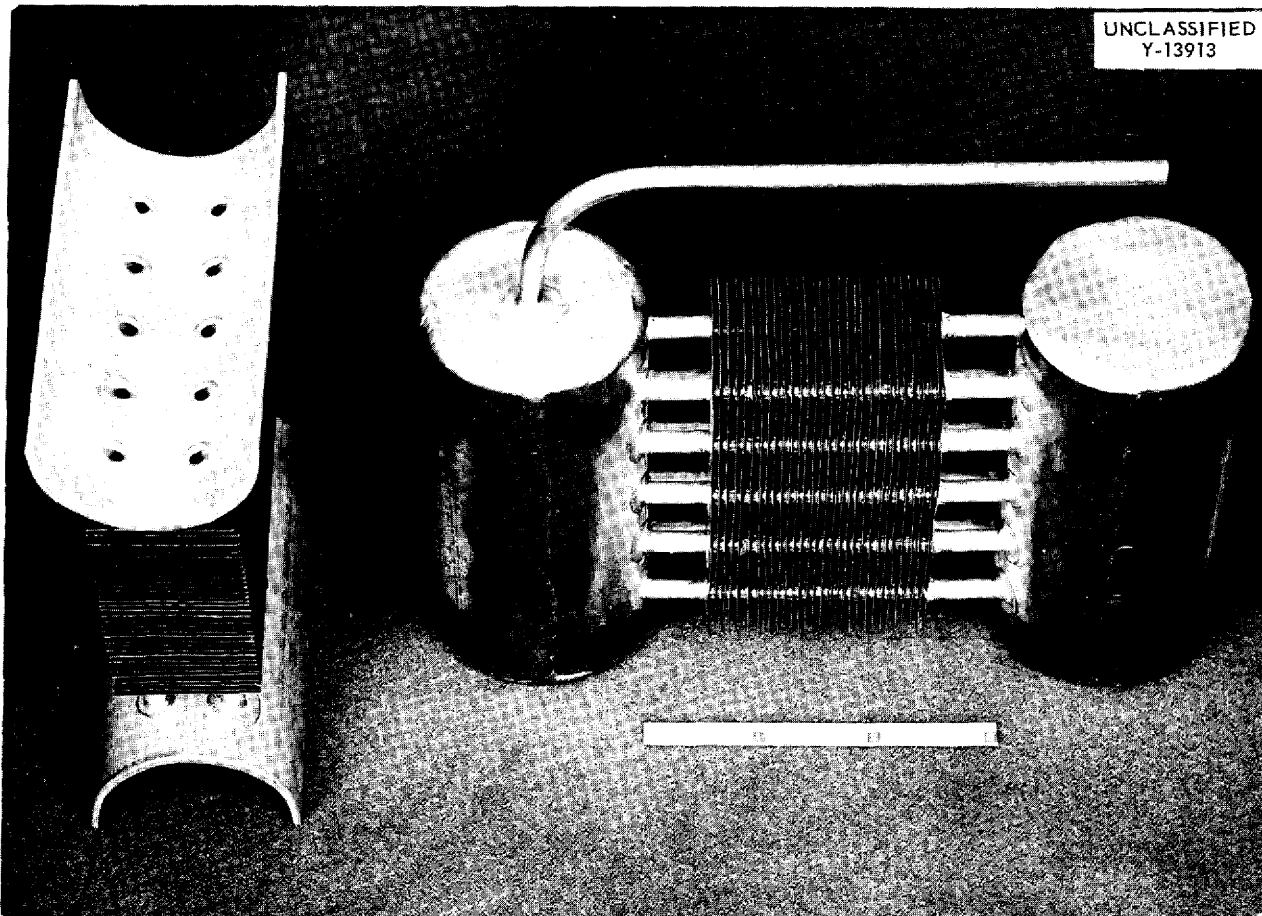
Hastelloy B Radiator Before Welding of Split Headers and Completed Test Radiator.
